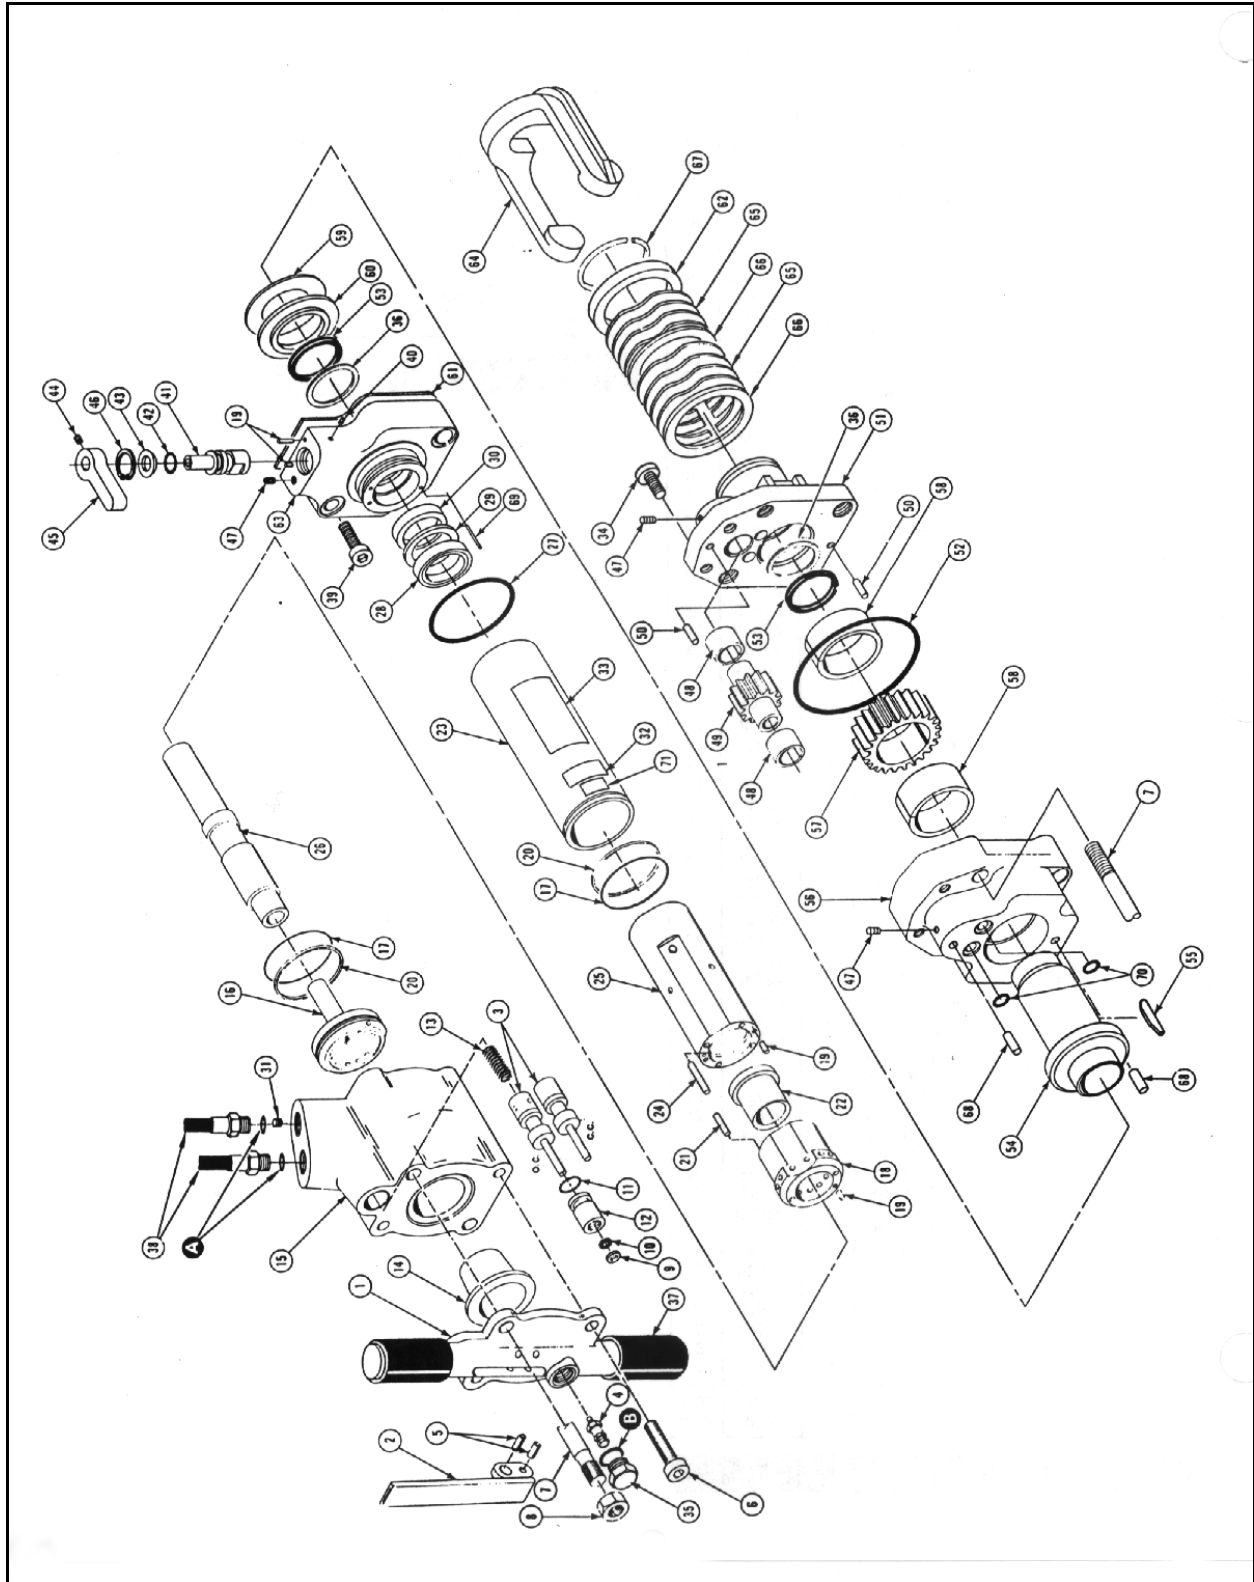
HD45310 Stanley Hydraulic Drill Exploded View.
